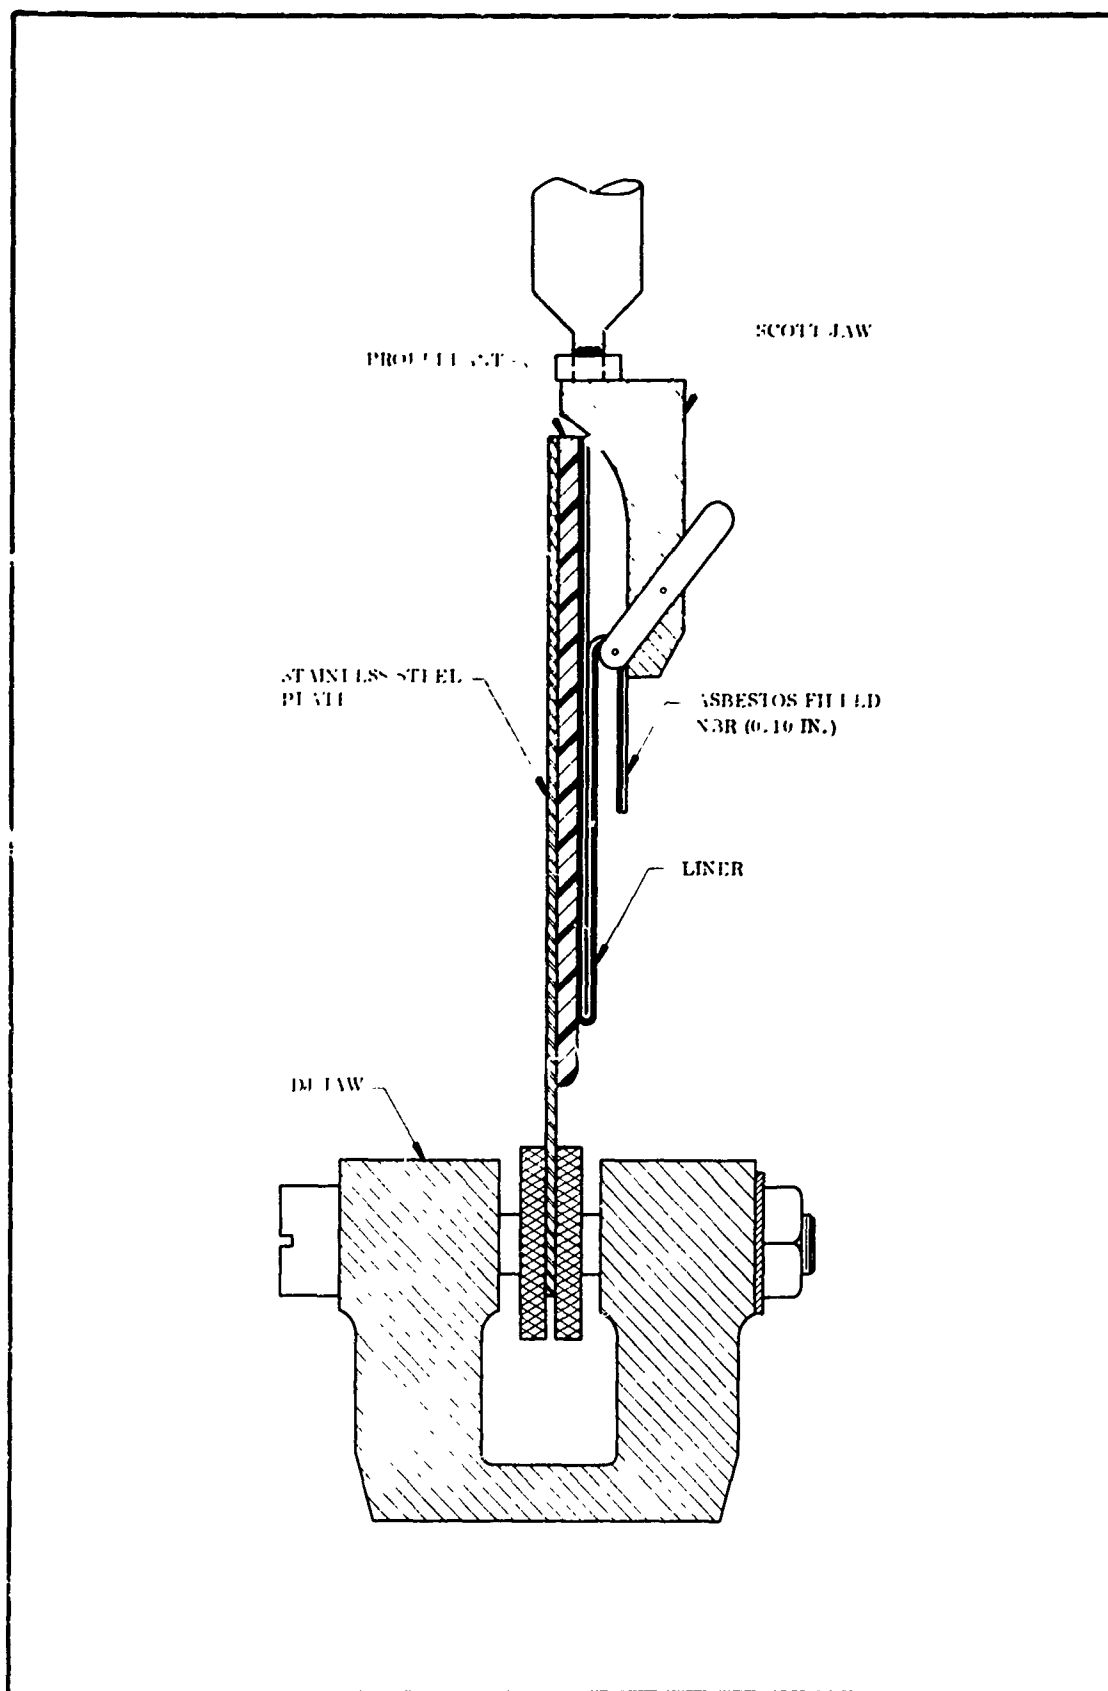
180 Deg Peel Test Specimen and Arrangement
